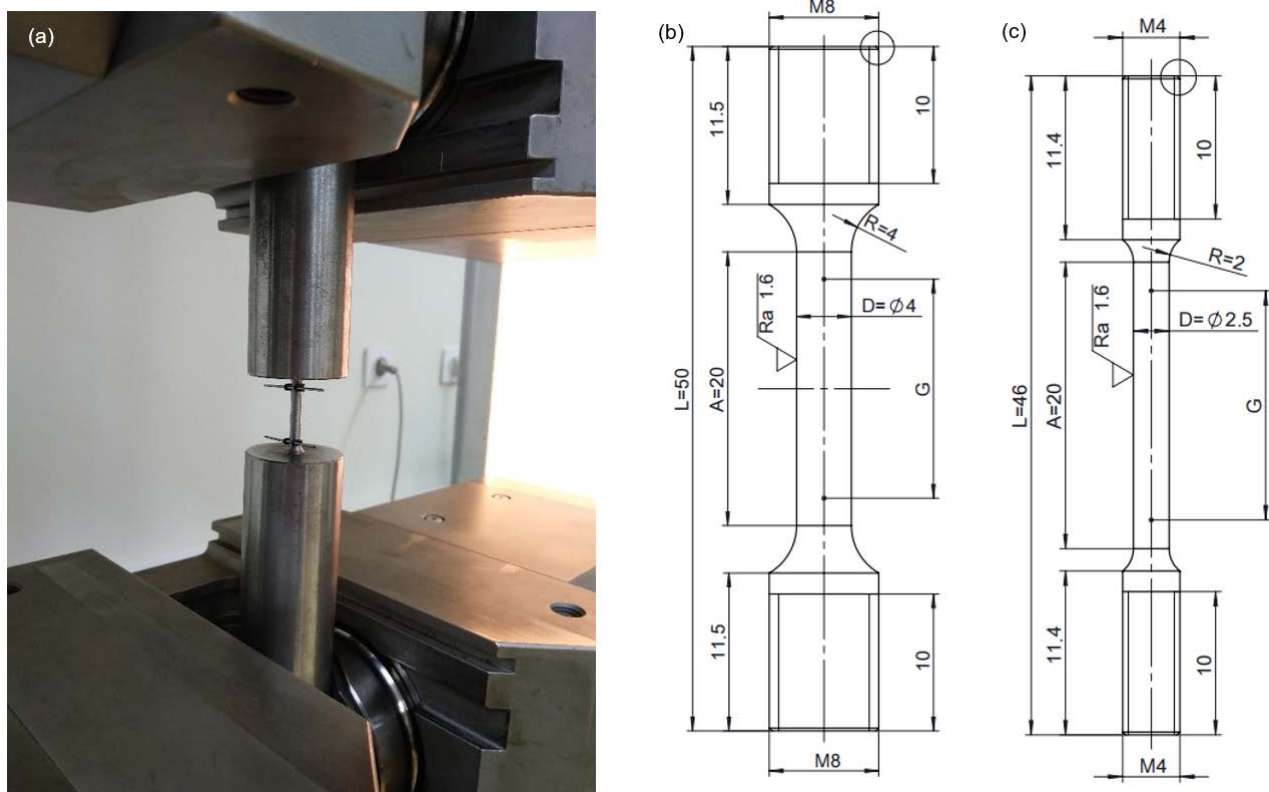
Tensile testing: (a) Messphysik BETA 250 testing machine; (b) ASTM E8 specimen $D = 4$ mm, M8 threaded ends; (c) ASTM E8 specimen $D = 2.5$ mm, M4 threaded ends.
